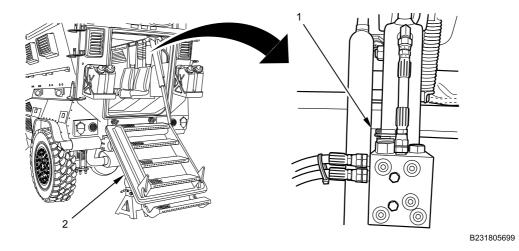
Rear Door/Ramp Lowered and Supported with Jackstand.
